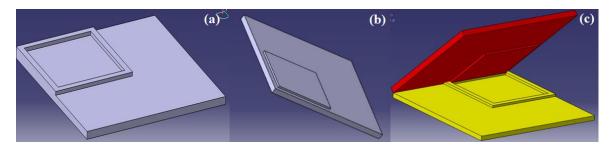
(a) Lower mold half, (b) upper mold half, and (c) open mold.
